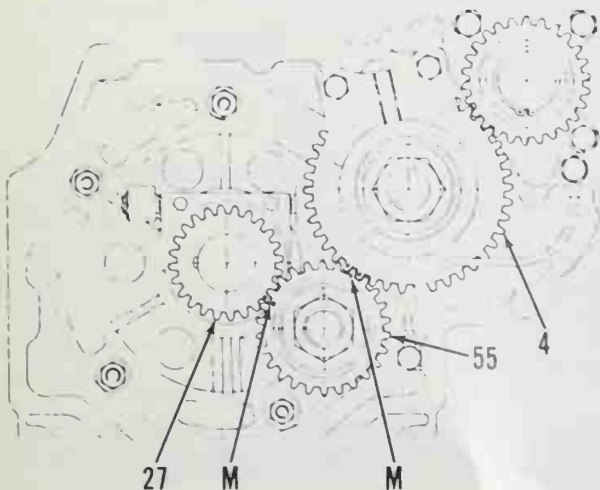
View showing location of timing marks (M) on camshaft gear (4), crankshaft gear (27) and oil pump gear (55).
